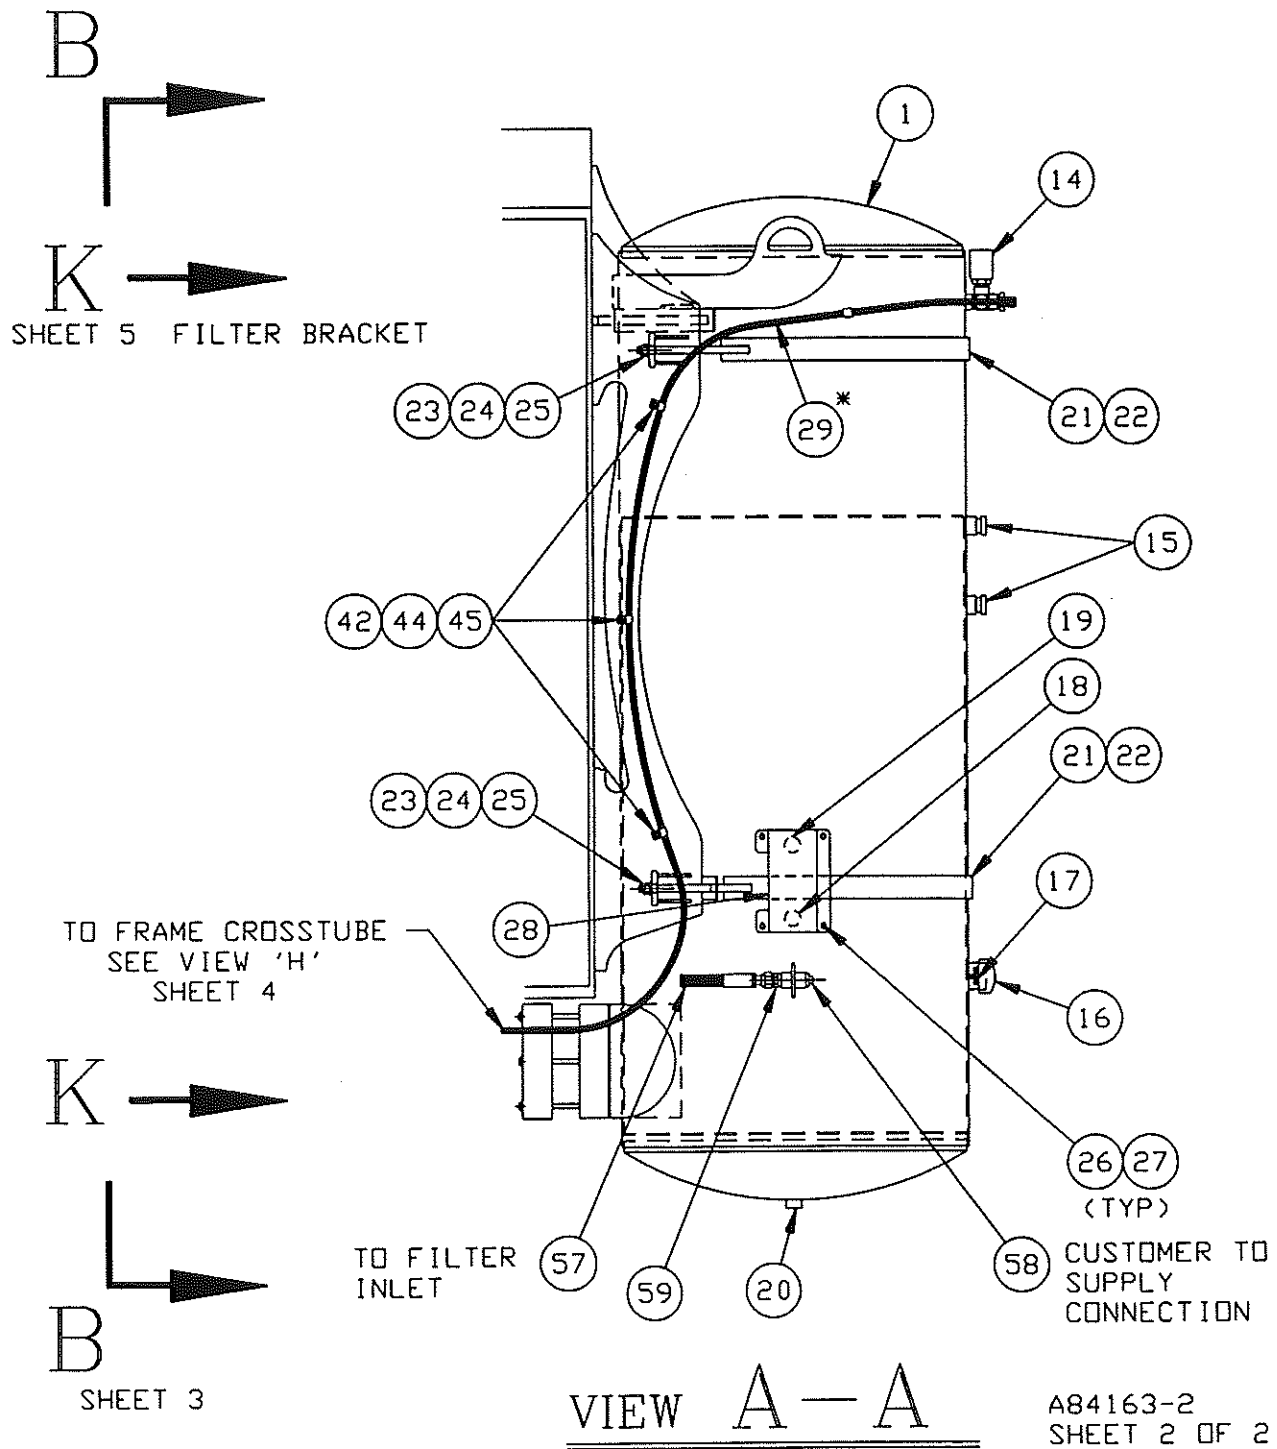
HYDRAULIC TANK ASSEMBLY - CONTINUED
